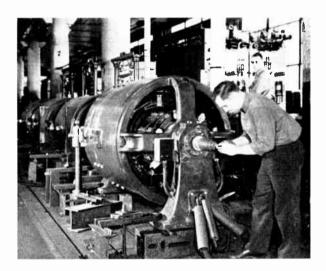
A 500-hp d-c dynamometer (right) being tested as a motor by loading it on three cradle-type machines connected in tandem
